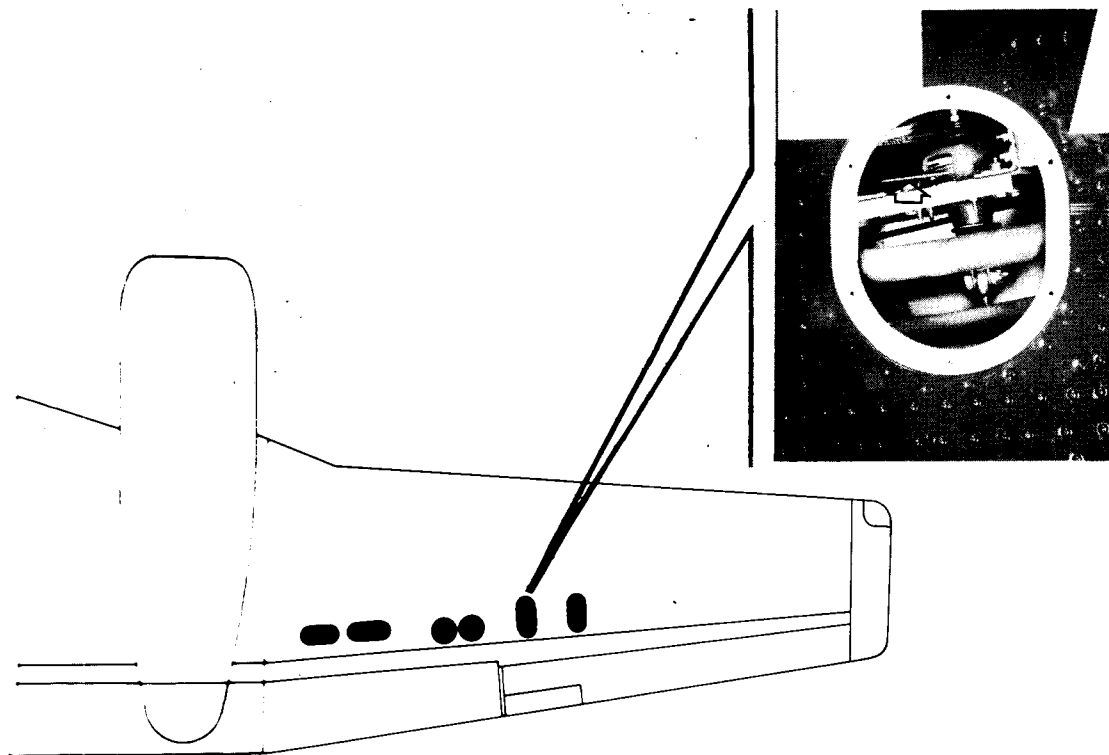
Aileron Tab Control Cables (Wheel Well to Actuator)
